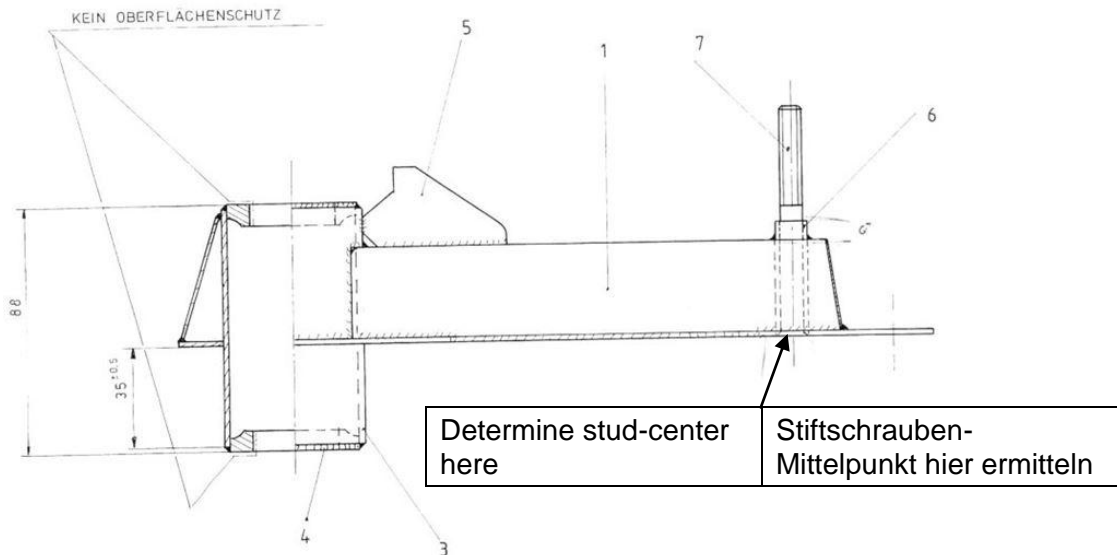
Tail mounting bracket G 109B (109-2807) / Abbildung 2 Spornbock G 109B (109-2807)
